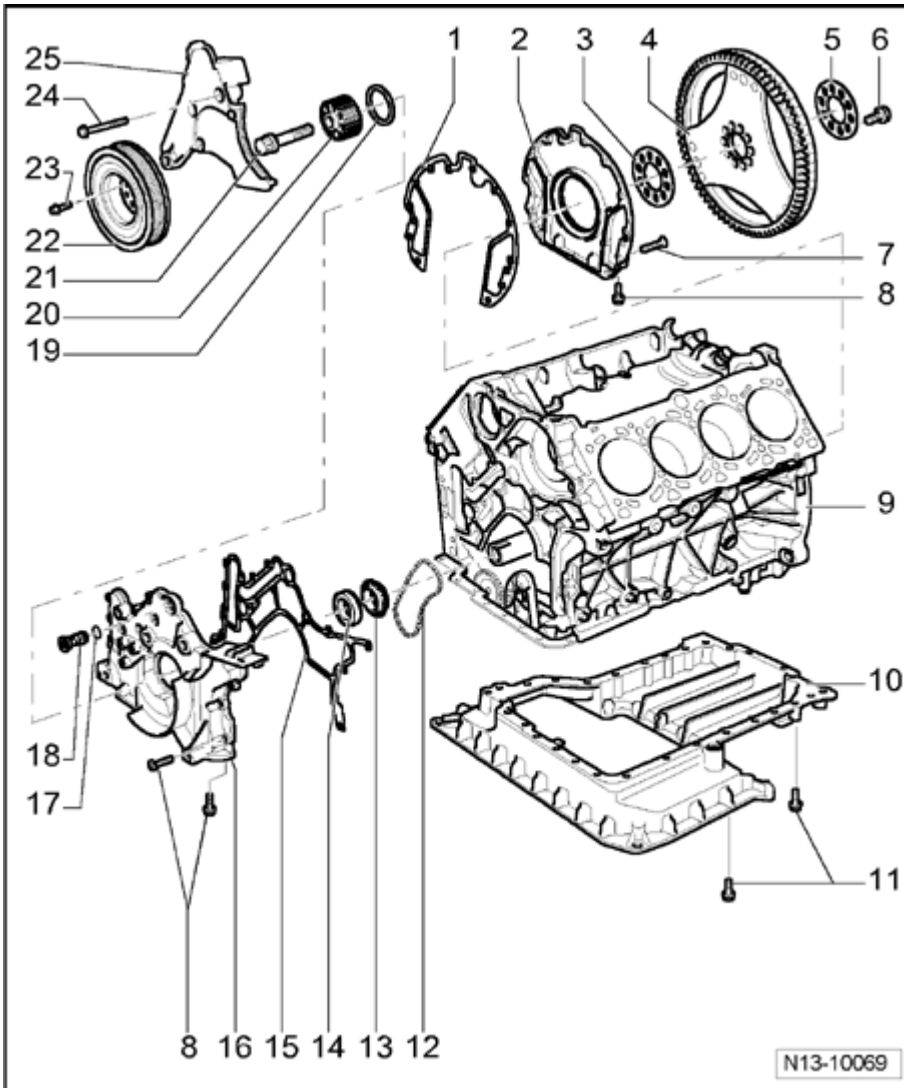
Sealing Flange And Drive Plate, Assembly Overview
